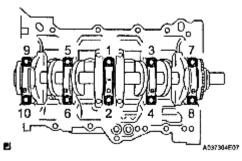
Identifying Crankshaft Bearing Bolts Tightening Sequence
